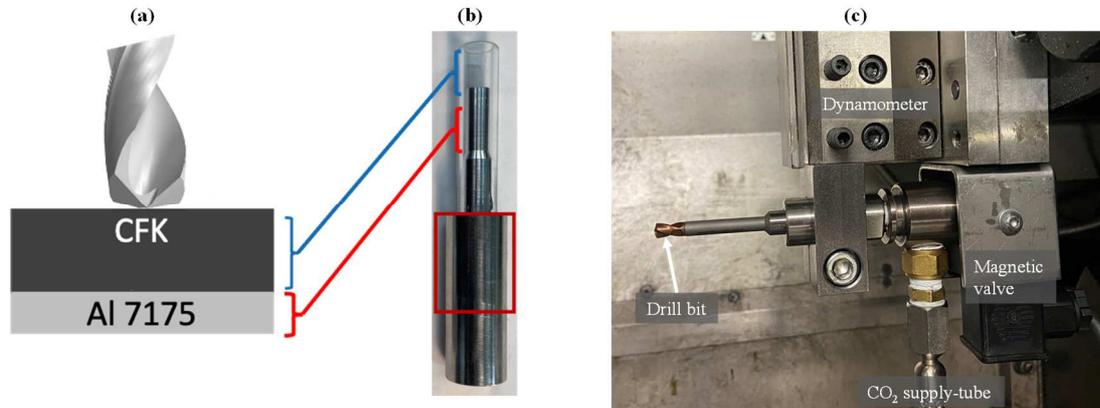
(a) CFRP/Al-stack drilling illustration; (b) Sample to approximate an arbitrary stack-drilling process (CFRP entry, Al exit) made out of aluminium with PMMA tube highlighting workpiece side cooling area with red rectangle; (c) Test rig configuration for tool-side cryogenic CO₂ cooling with drill bit (C3)
